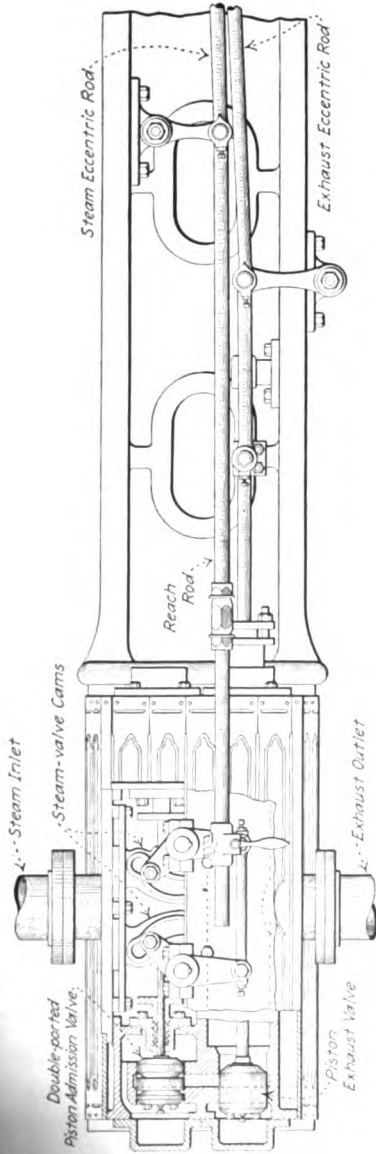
Side view of Fitchburg engine showing valve mechanism.
